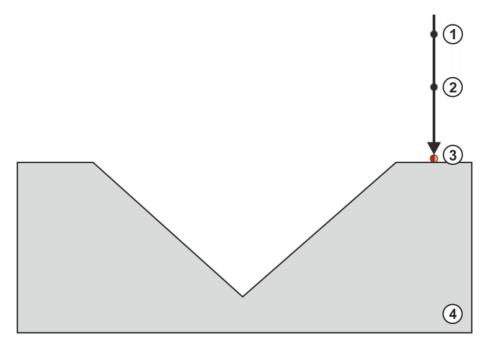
Search for upper edge of weld, Single Touch
